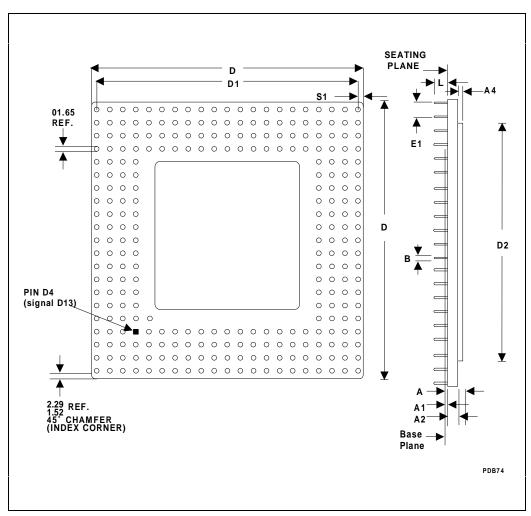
Pentium® Processor (510\60, 567\66) Package Dimensions
